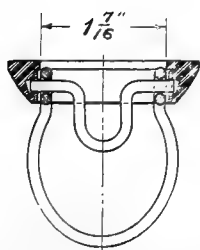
Gold's Steam Coupler Gasket, No. 403B.
